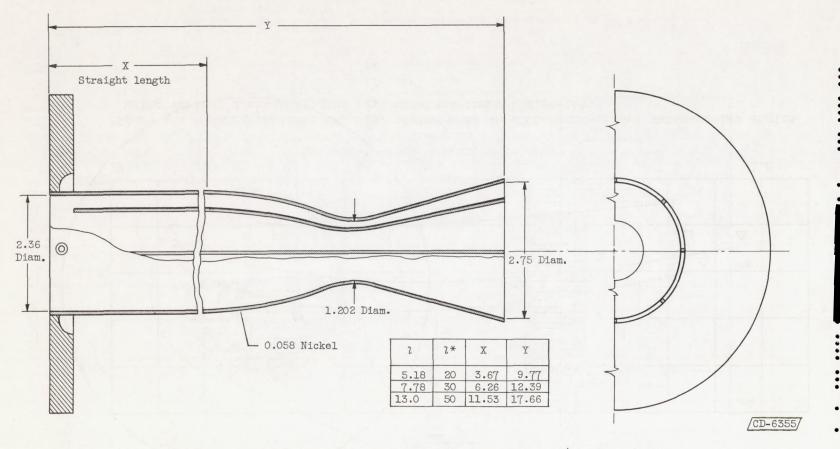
Chamber for 1000-pound-thrust water-cooled engine. (All dimensions in inches.)
